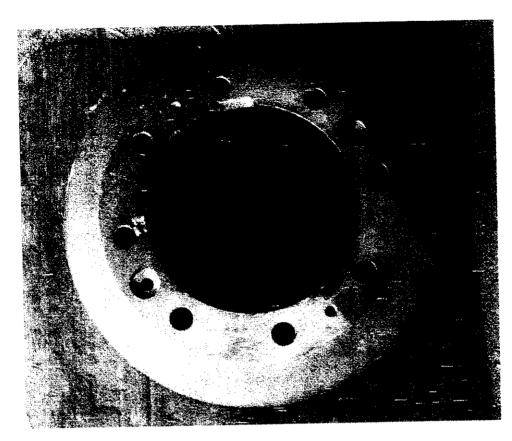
FRONT VIEW OF 10TG BRAKE DRUM
